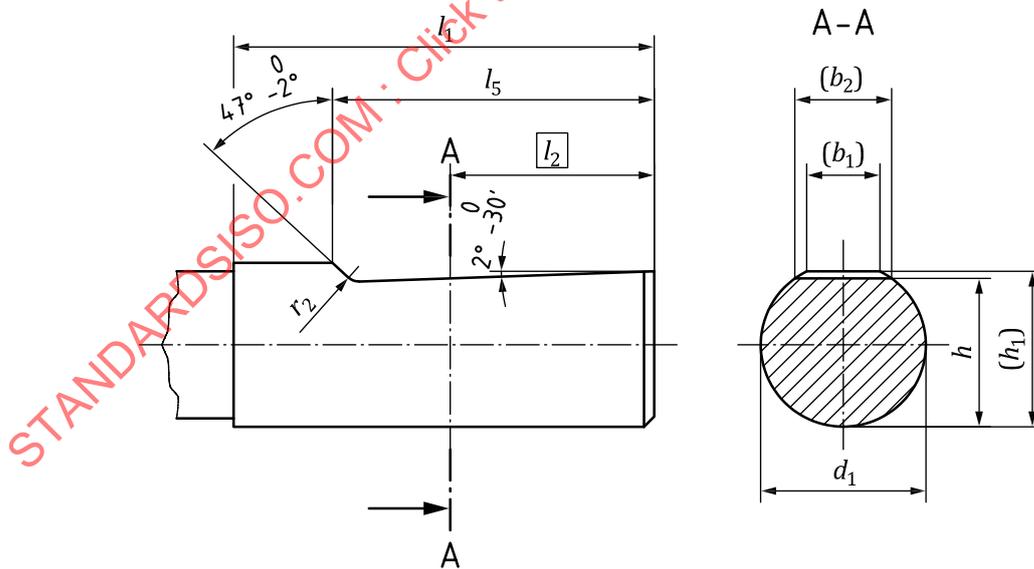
WN form — Flatted cylindrical shanks with inclined clamping surface
